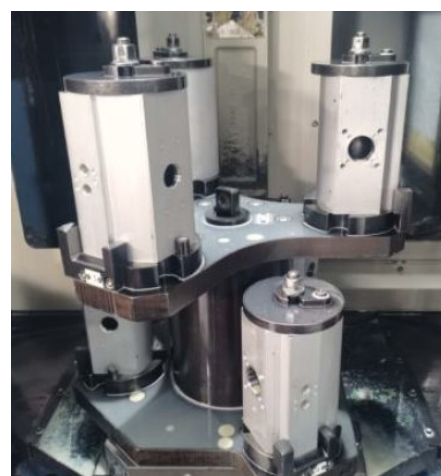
Position of machined holes for pressurizing outer chambers in the new concept of extruded center body.
